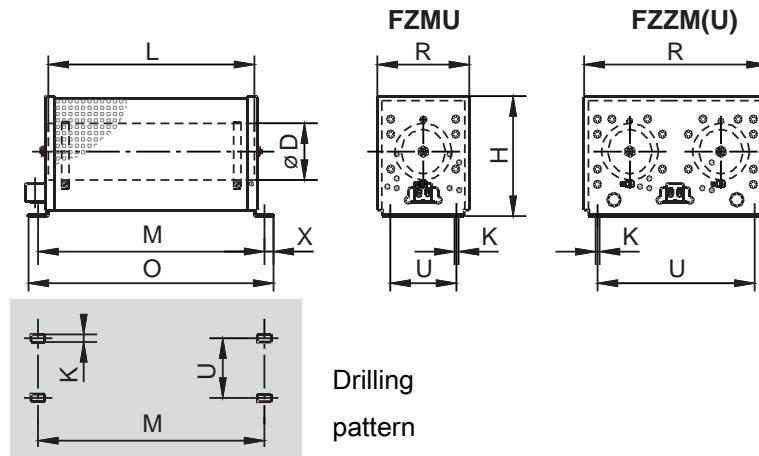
Dimensional drawing FZMU, FZZMU 400×65
